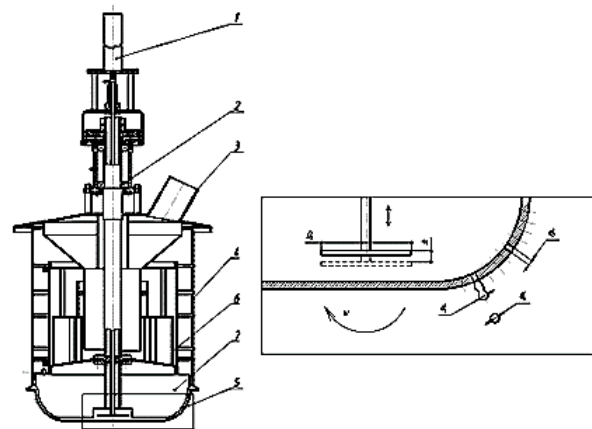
Rotational vibopriller: 1 – oscillator; 2 – bearing; 3 – inlet nozzle for melt; 4 – cylindrical casing; 5 – perforated bottom (basket); 6 – distributor; 7 – vanes
